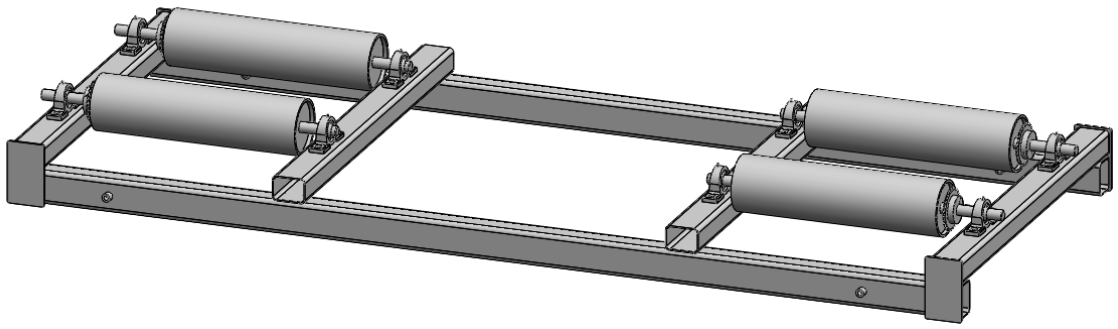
Isometric View of the Bottom Frame and Bottom Rollers subassembly [11].
